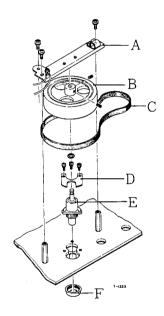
Flywheel and Capstan Ass'y Removal
